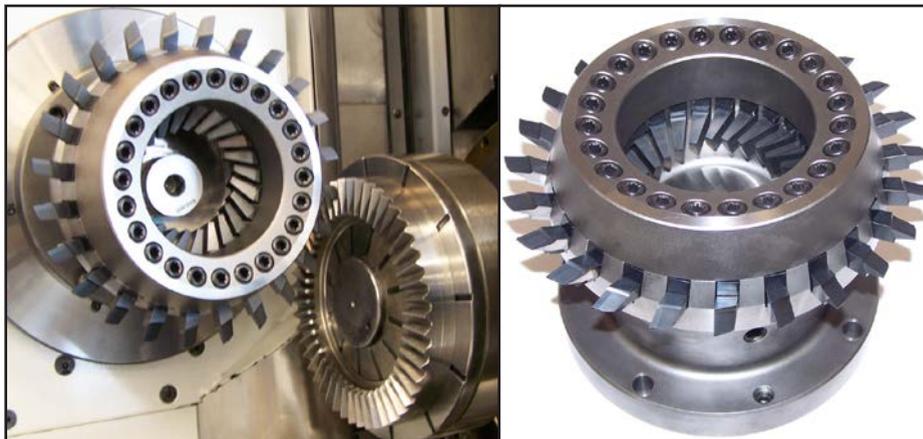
Coniface cutting (left), carbide stick blade cutter (right).
